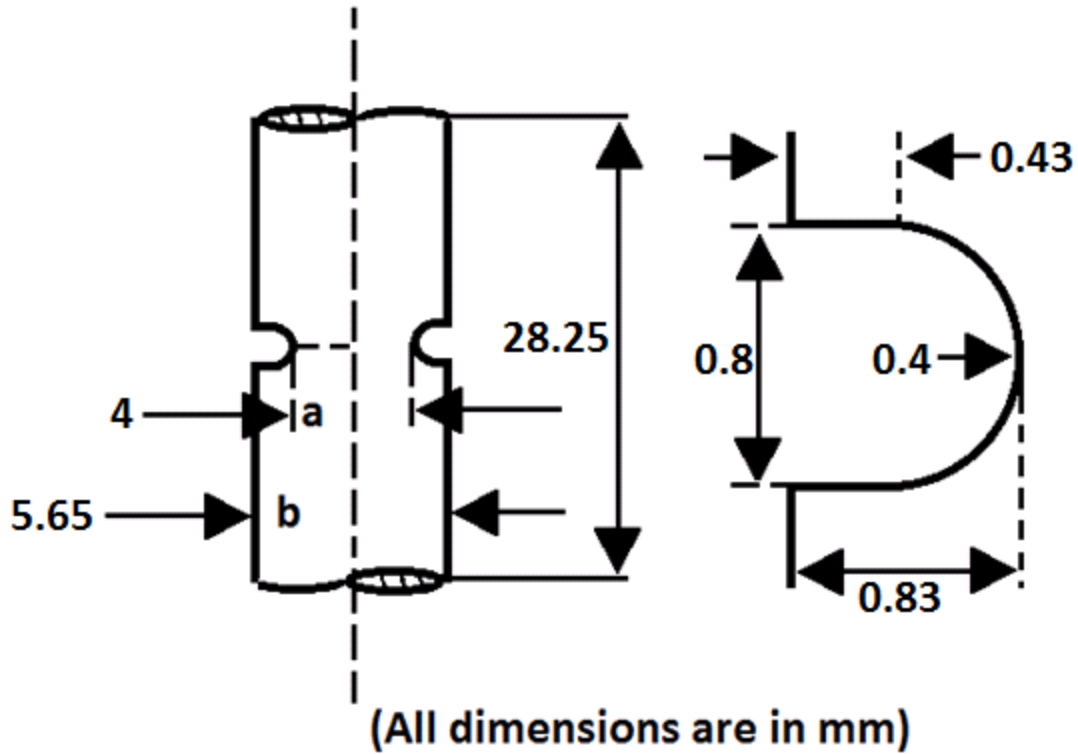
Specimen Dimensions (tolerances of 0.01mm for machining)
